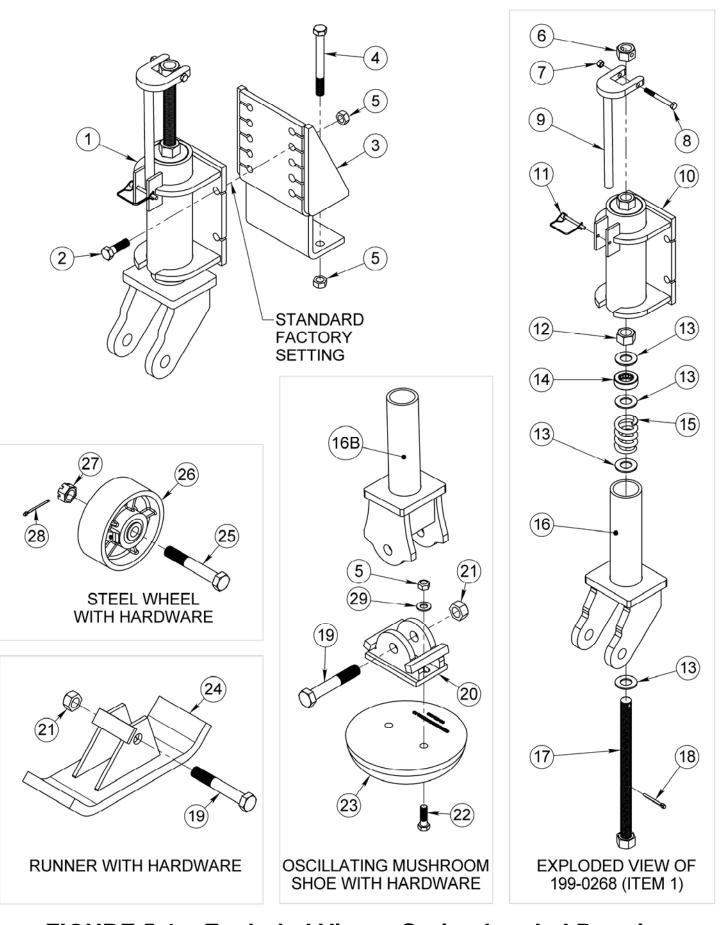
Exploded Views: Spring Loaded Running
